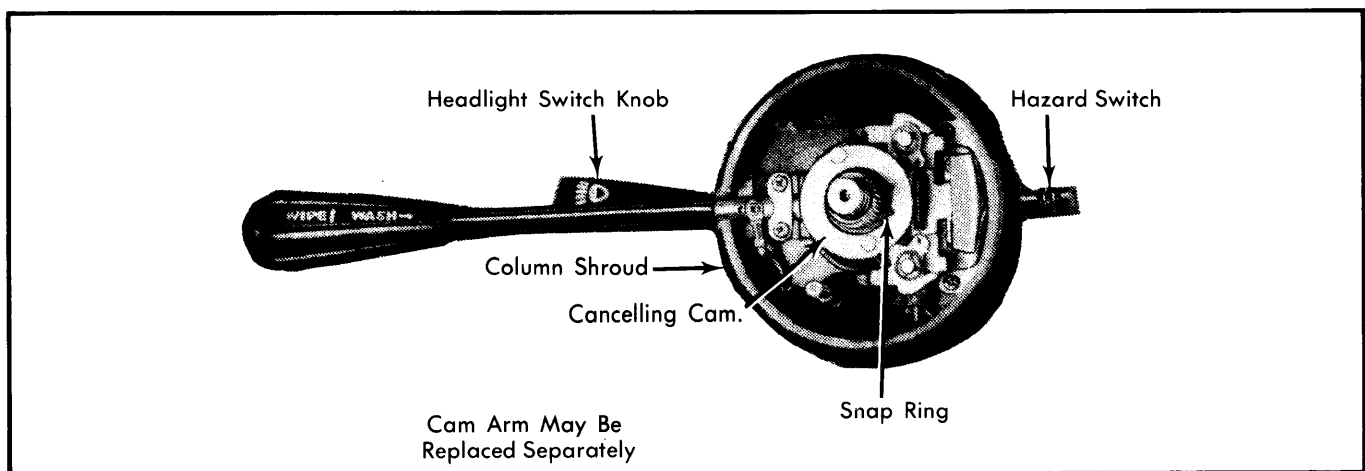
Top View of Steering Column with Steering Wheel Removed to Expose Combination Switch
